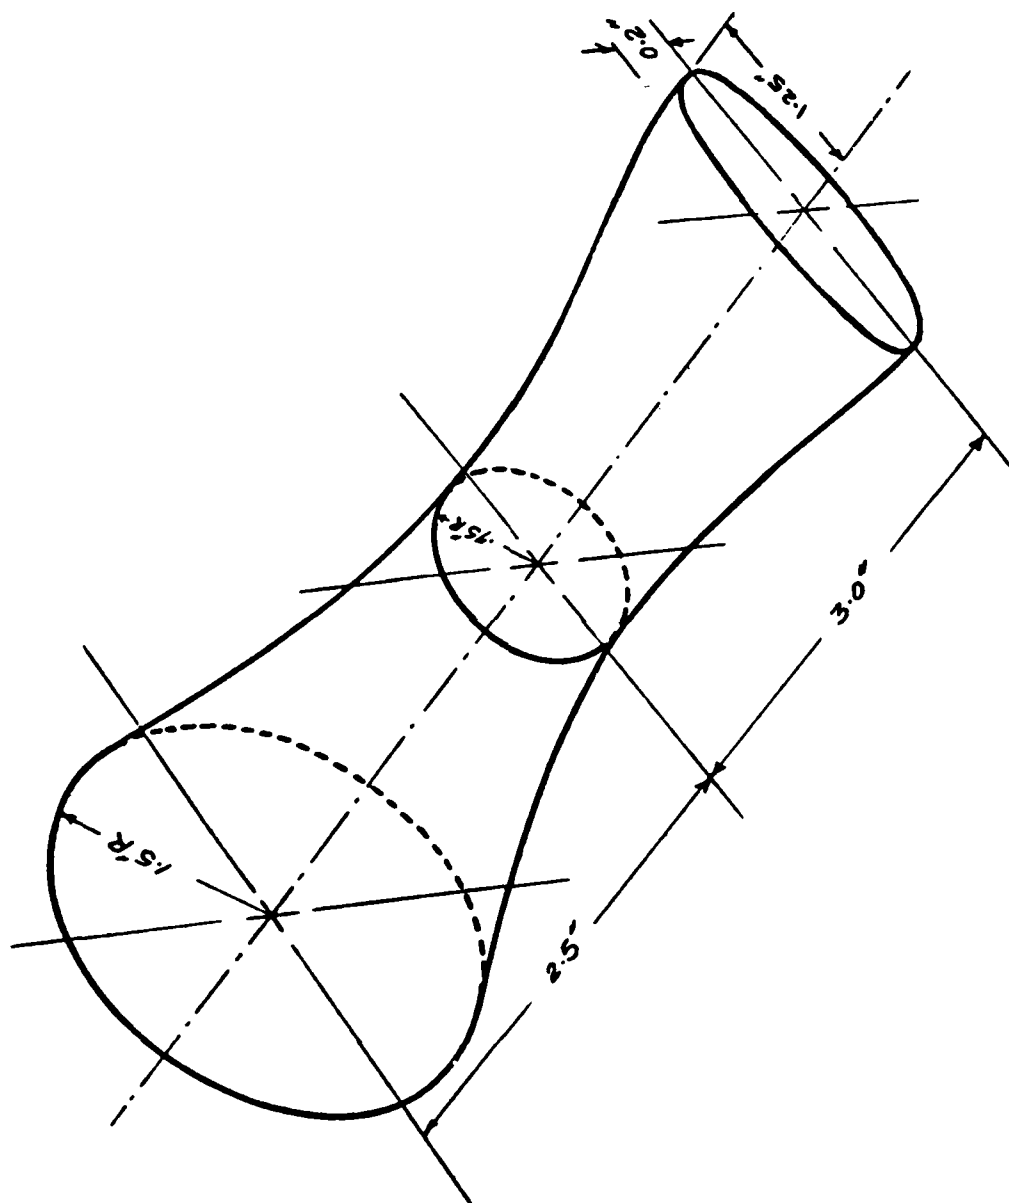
Schematic Drawing of Elliptical Nozzle.
